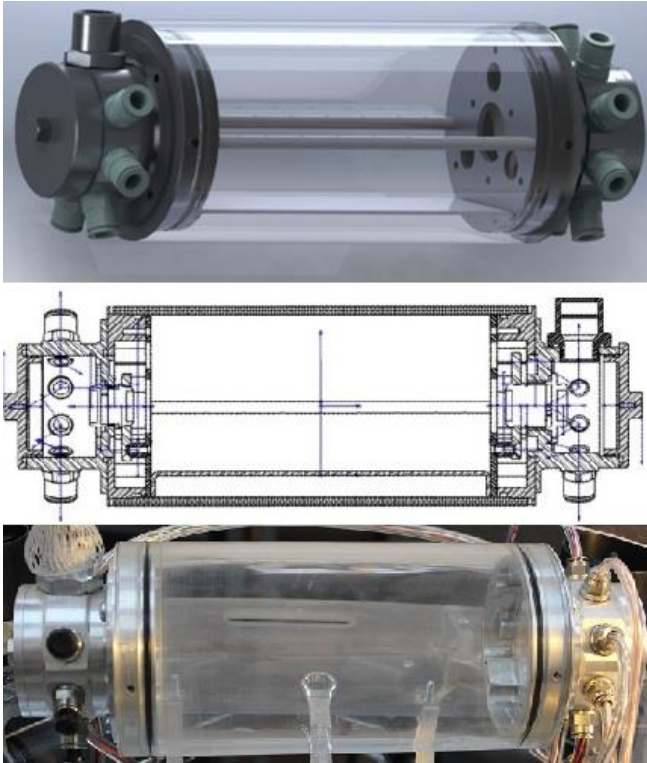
Housing of electronics unit (CAD model, drawing and real assembly)
